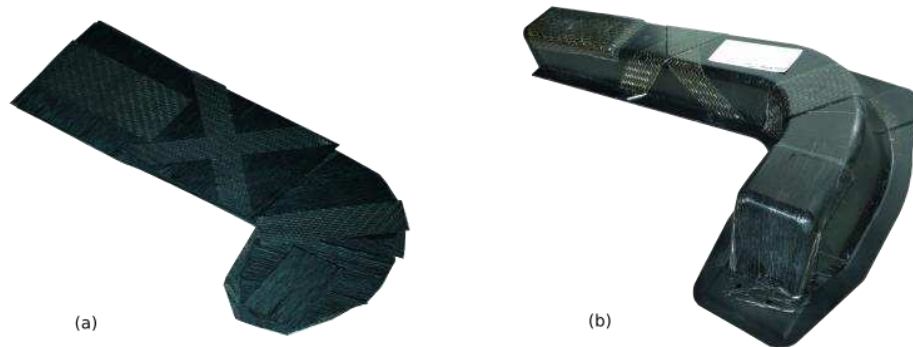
(a) Flat two dimensional stack of prepregs before QSP® (b) Final formed part
